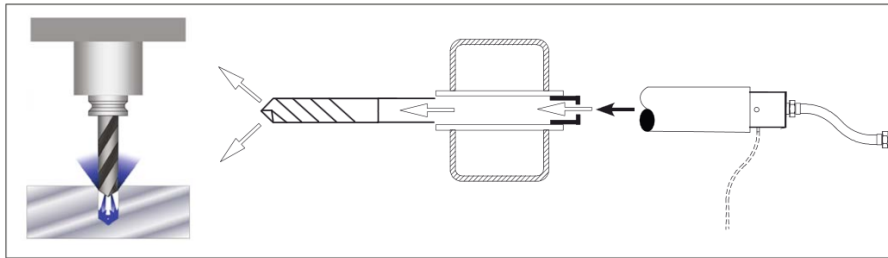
In a TSC system, a rotating union is attached to one end of the spindles and passes coolant into the shaft. The coolant flows through the tool to the cutting edges. Source: Deublin
